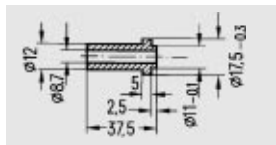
/120 Nipple G $\frac{1}{2}$ , dimensions
